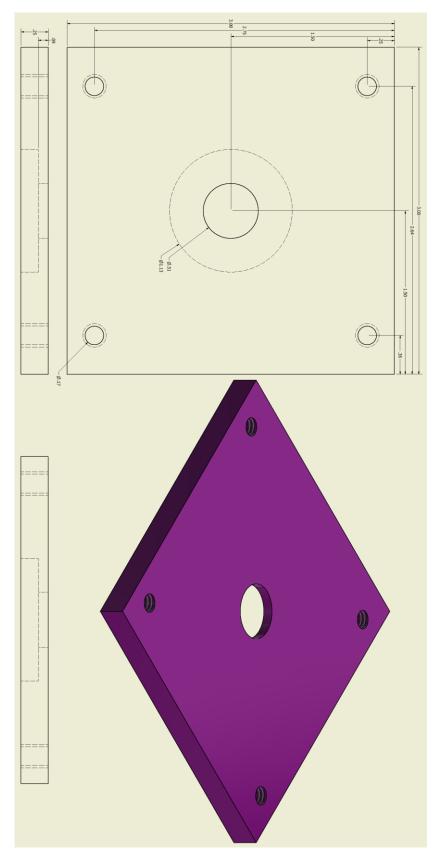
Base Bearing Cover Lower Half Mechanical Drawing (Units: in)
